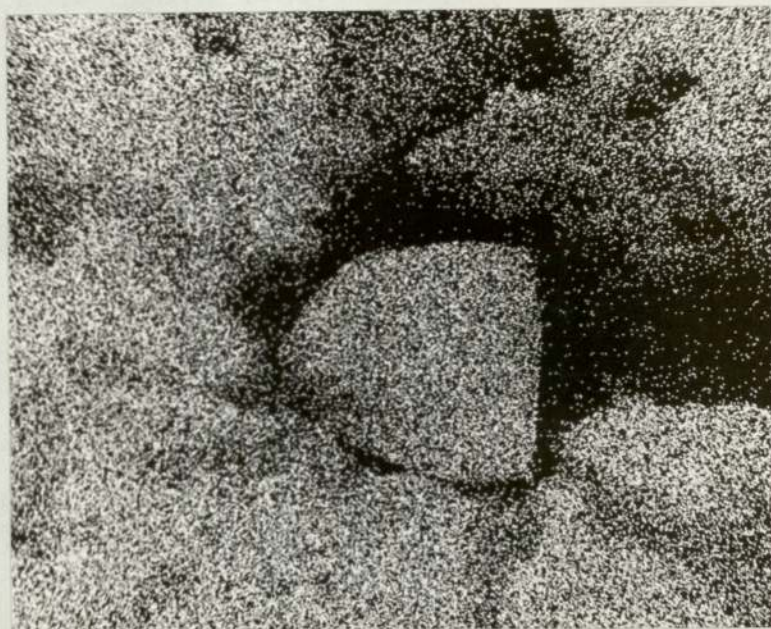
S.E.M.-View of Fracture Surface Showing Tensile Dimples of Various Sizes.
